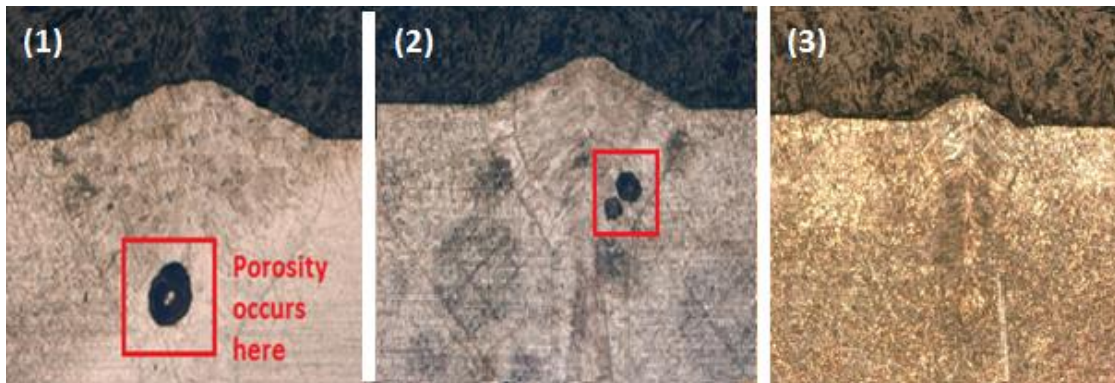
Horizontal cross section view of weld on stainless steel.
